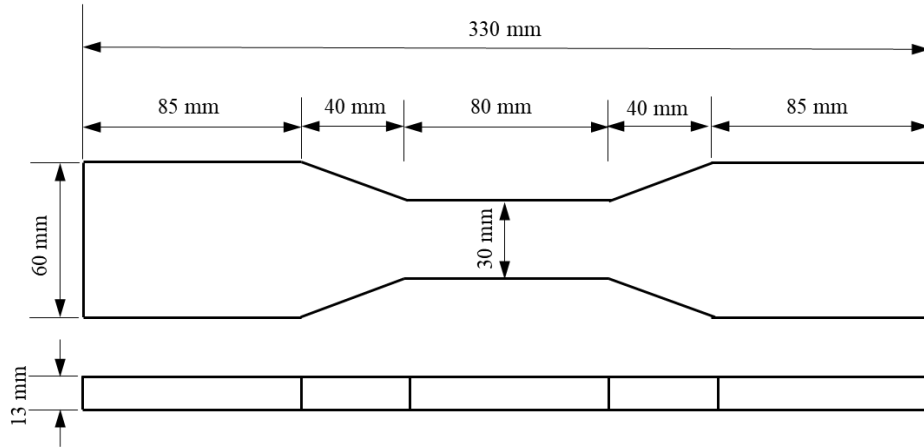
Dimensions of the dog-bone shaped specimen for the uniaxial tension test.
